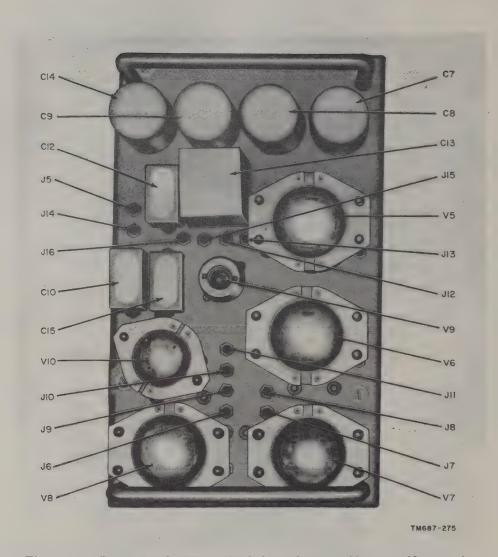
Power Supply PP-685/TRC, low-voltage rectifier assembly, top view.
